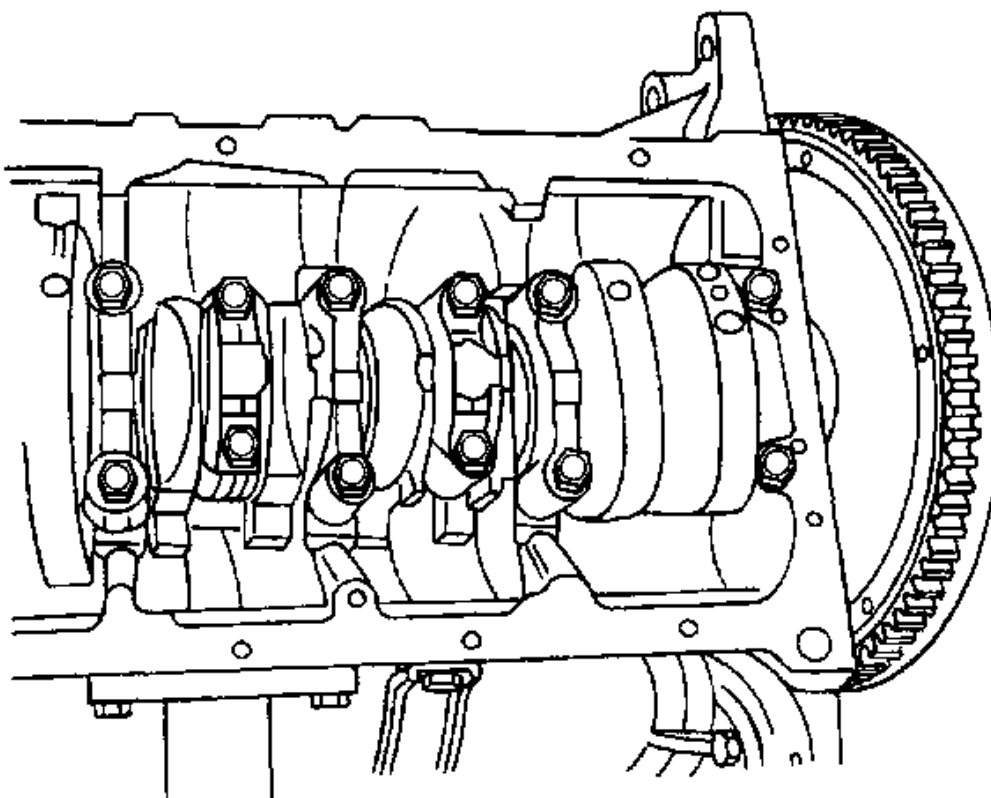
View Of Connecting Rod Bearing Caps And Bolts
